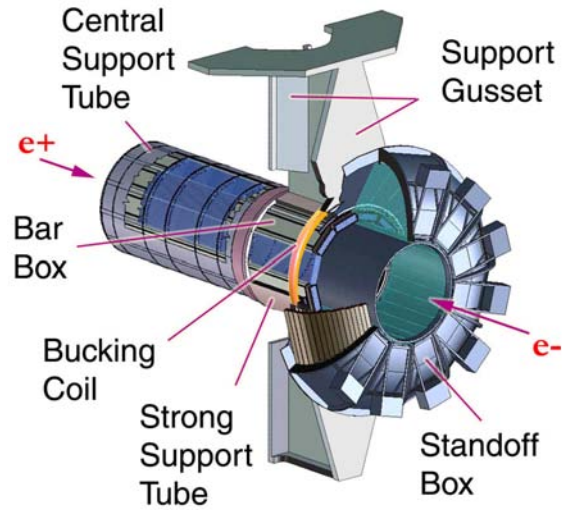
Exploded view of the DIRC mechanical support structure.
